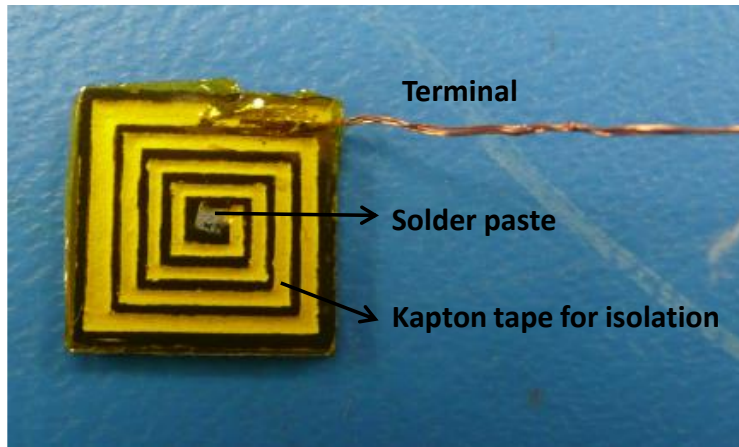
Sintered inductor half with silver paste as the winding. A thin layer of Kapton tape was placed on the surface for isolation. Two inductor halves were connected at the center by solder.
